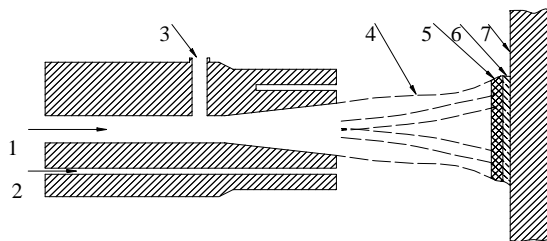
Flame spraying with Eutalloy torch (spray and fuse type process). (1)Compressed air, (2)Oxyacetylene gas, (3)Powder, (4)Fused metal spray, (5)Final coating, (6)Base Coating and (7)Work piece.
